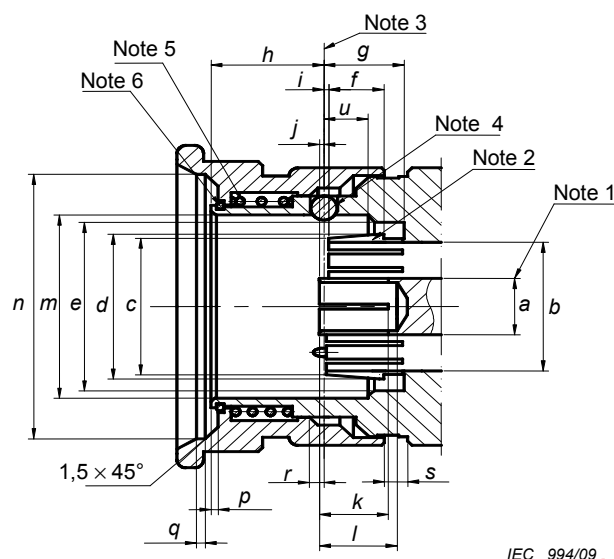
Connector with socket-centre contact (for dimensions, see Table 2)
